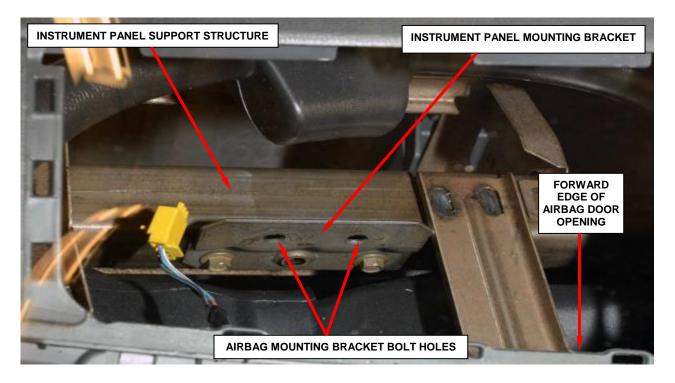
Instrument Panel Mounting Bracket Viewed through Windshield and Airbag Door Opening
